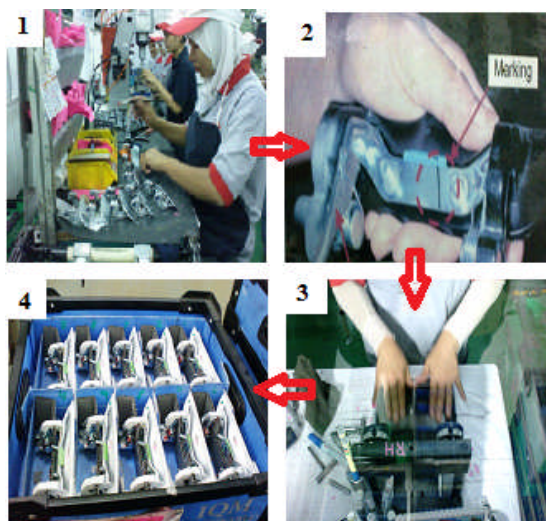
The works sequence to assemble complete Handle Assembly Door Outside
